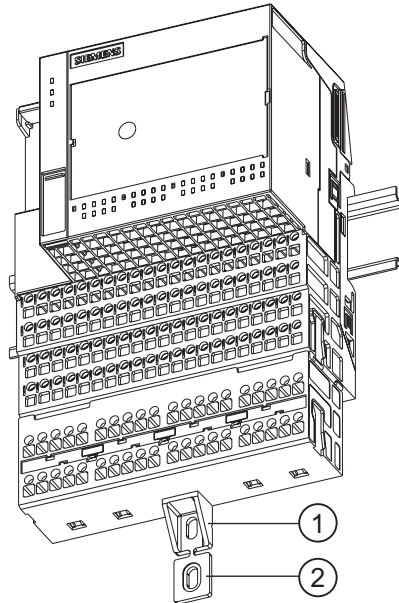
Stabilizing an add-on terminal with fixing bracket
